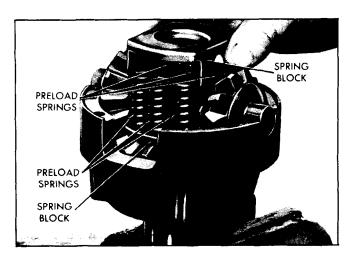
B-14 Installing Second Spring Block - Two Pinion
